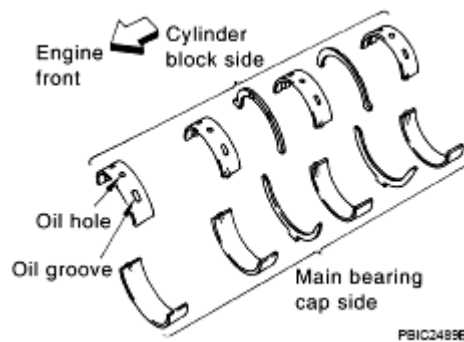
Identifying Oil Holes On Cylinder Block And Bearing
